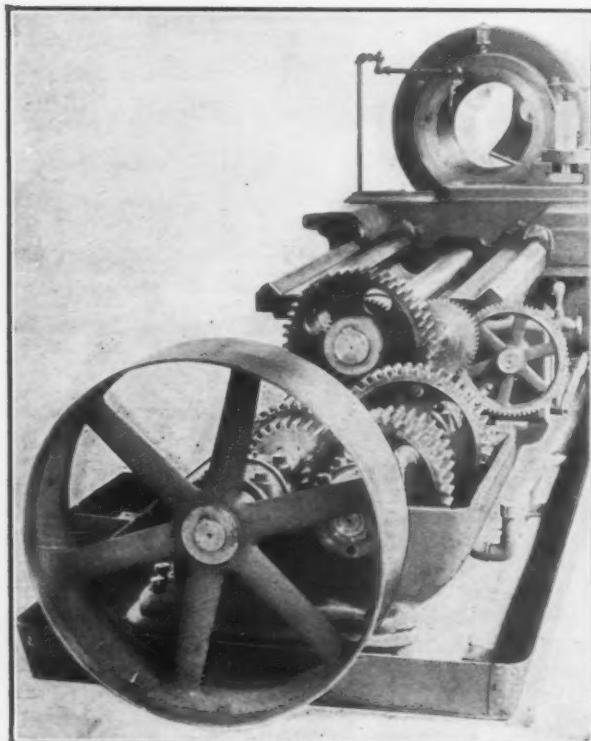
An End View, Showing the Drive and the Carriage Bearing on the Bed.
